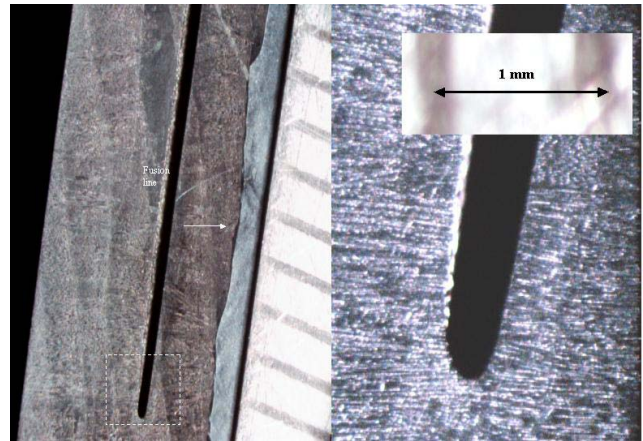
Shape of the 25 mm deep defect inserted into the trial DMW
